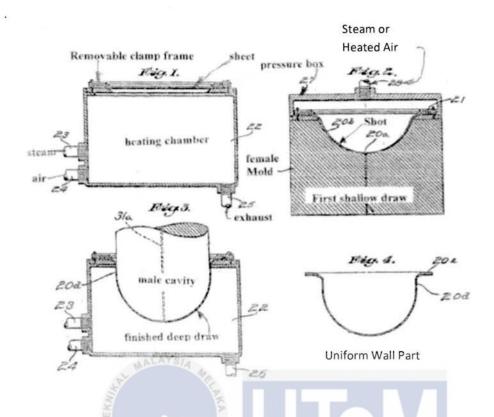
F.E.Wiley of Plax Corp filed for Patent 6-1-1944for a method of deep drawing plastic sheets
